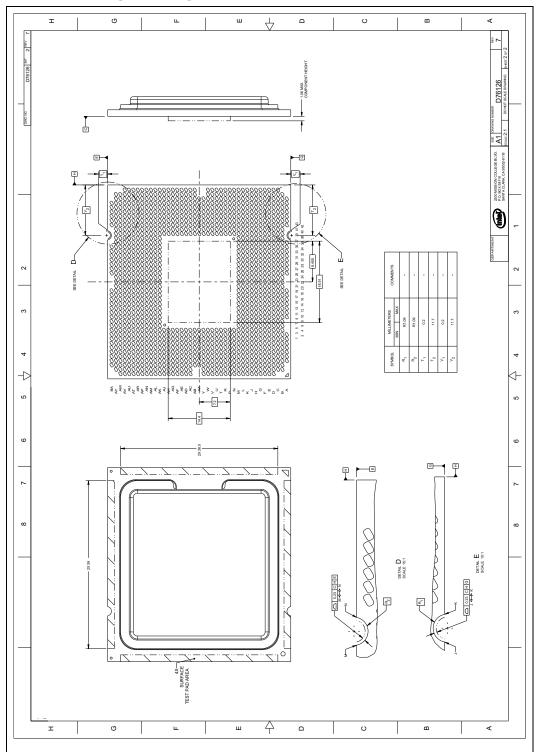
Processor Package Drawing (Sheet 2 of 2)
